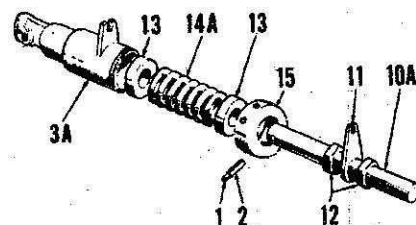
Exploded view of front end assembly of double acting (draft sensitive under both tension and compression) top link.
